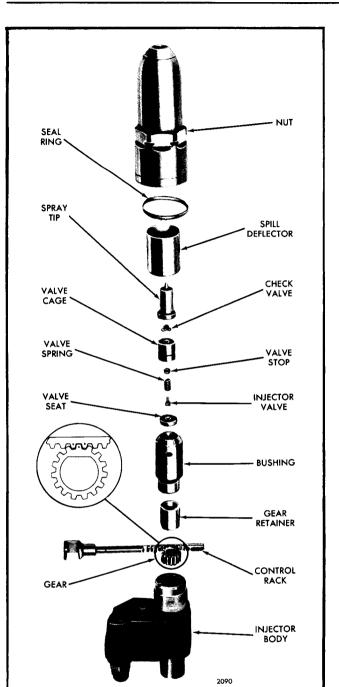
Injector Rack, Gear, Spray Tip and Valve Assembly Details and Relative Location of Parts
